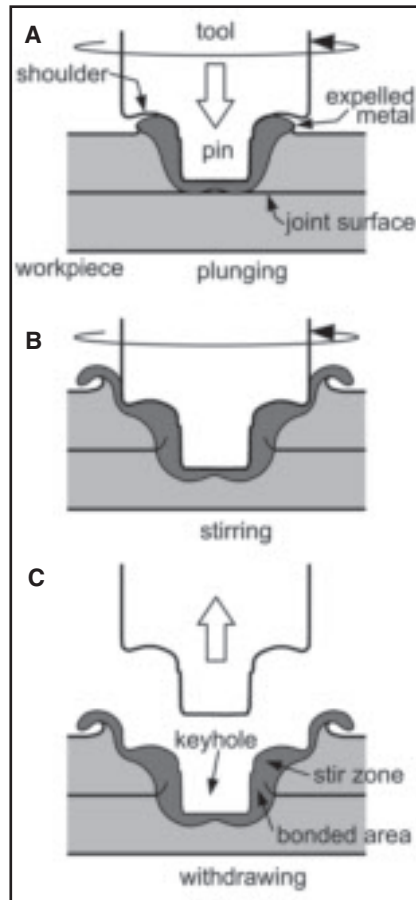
Friction stir spot welding (FSSW). A — Plunging; B — stirring; C — withdrawing.
